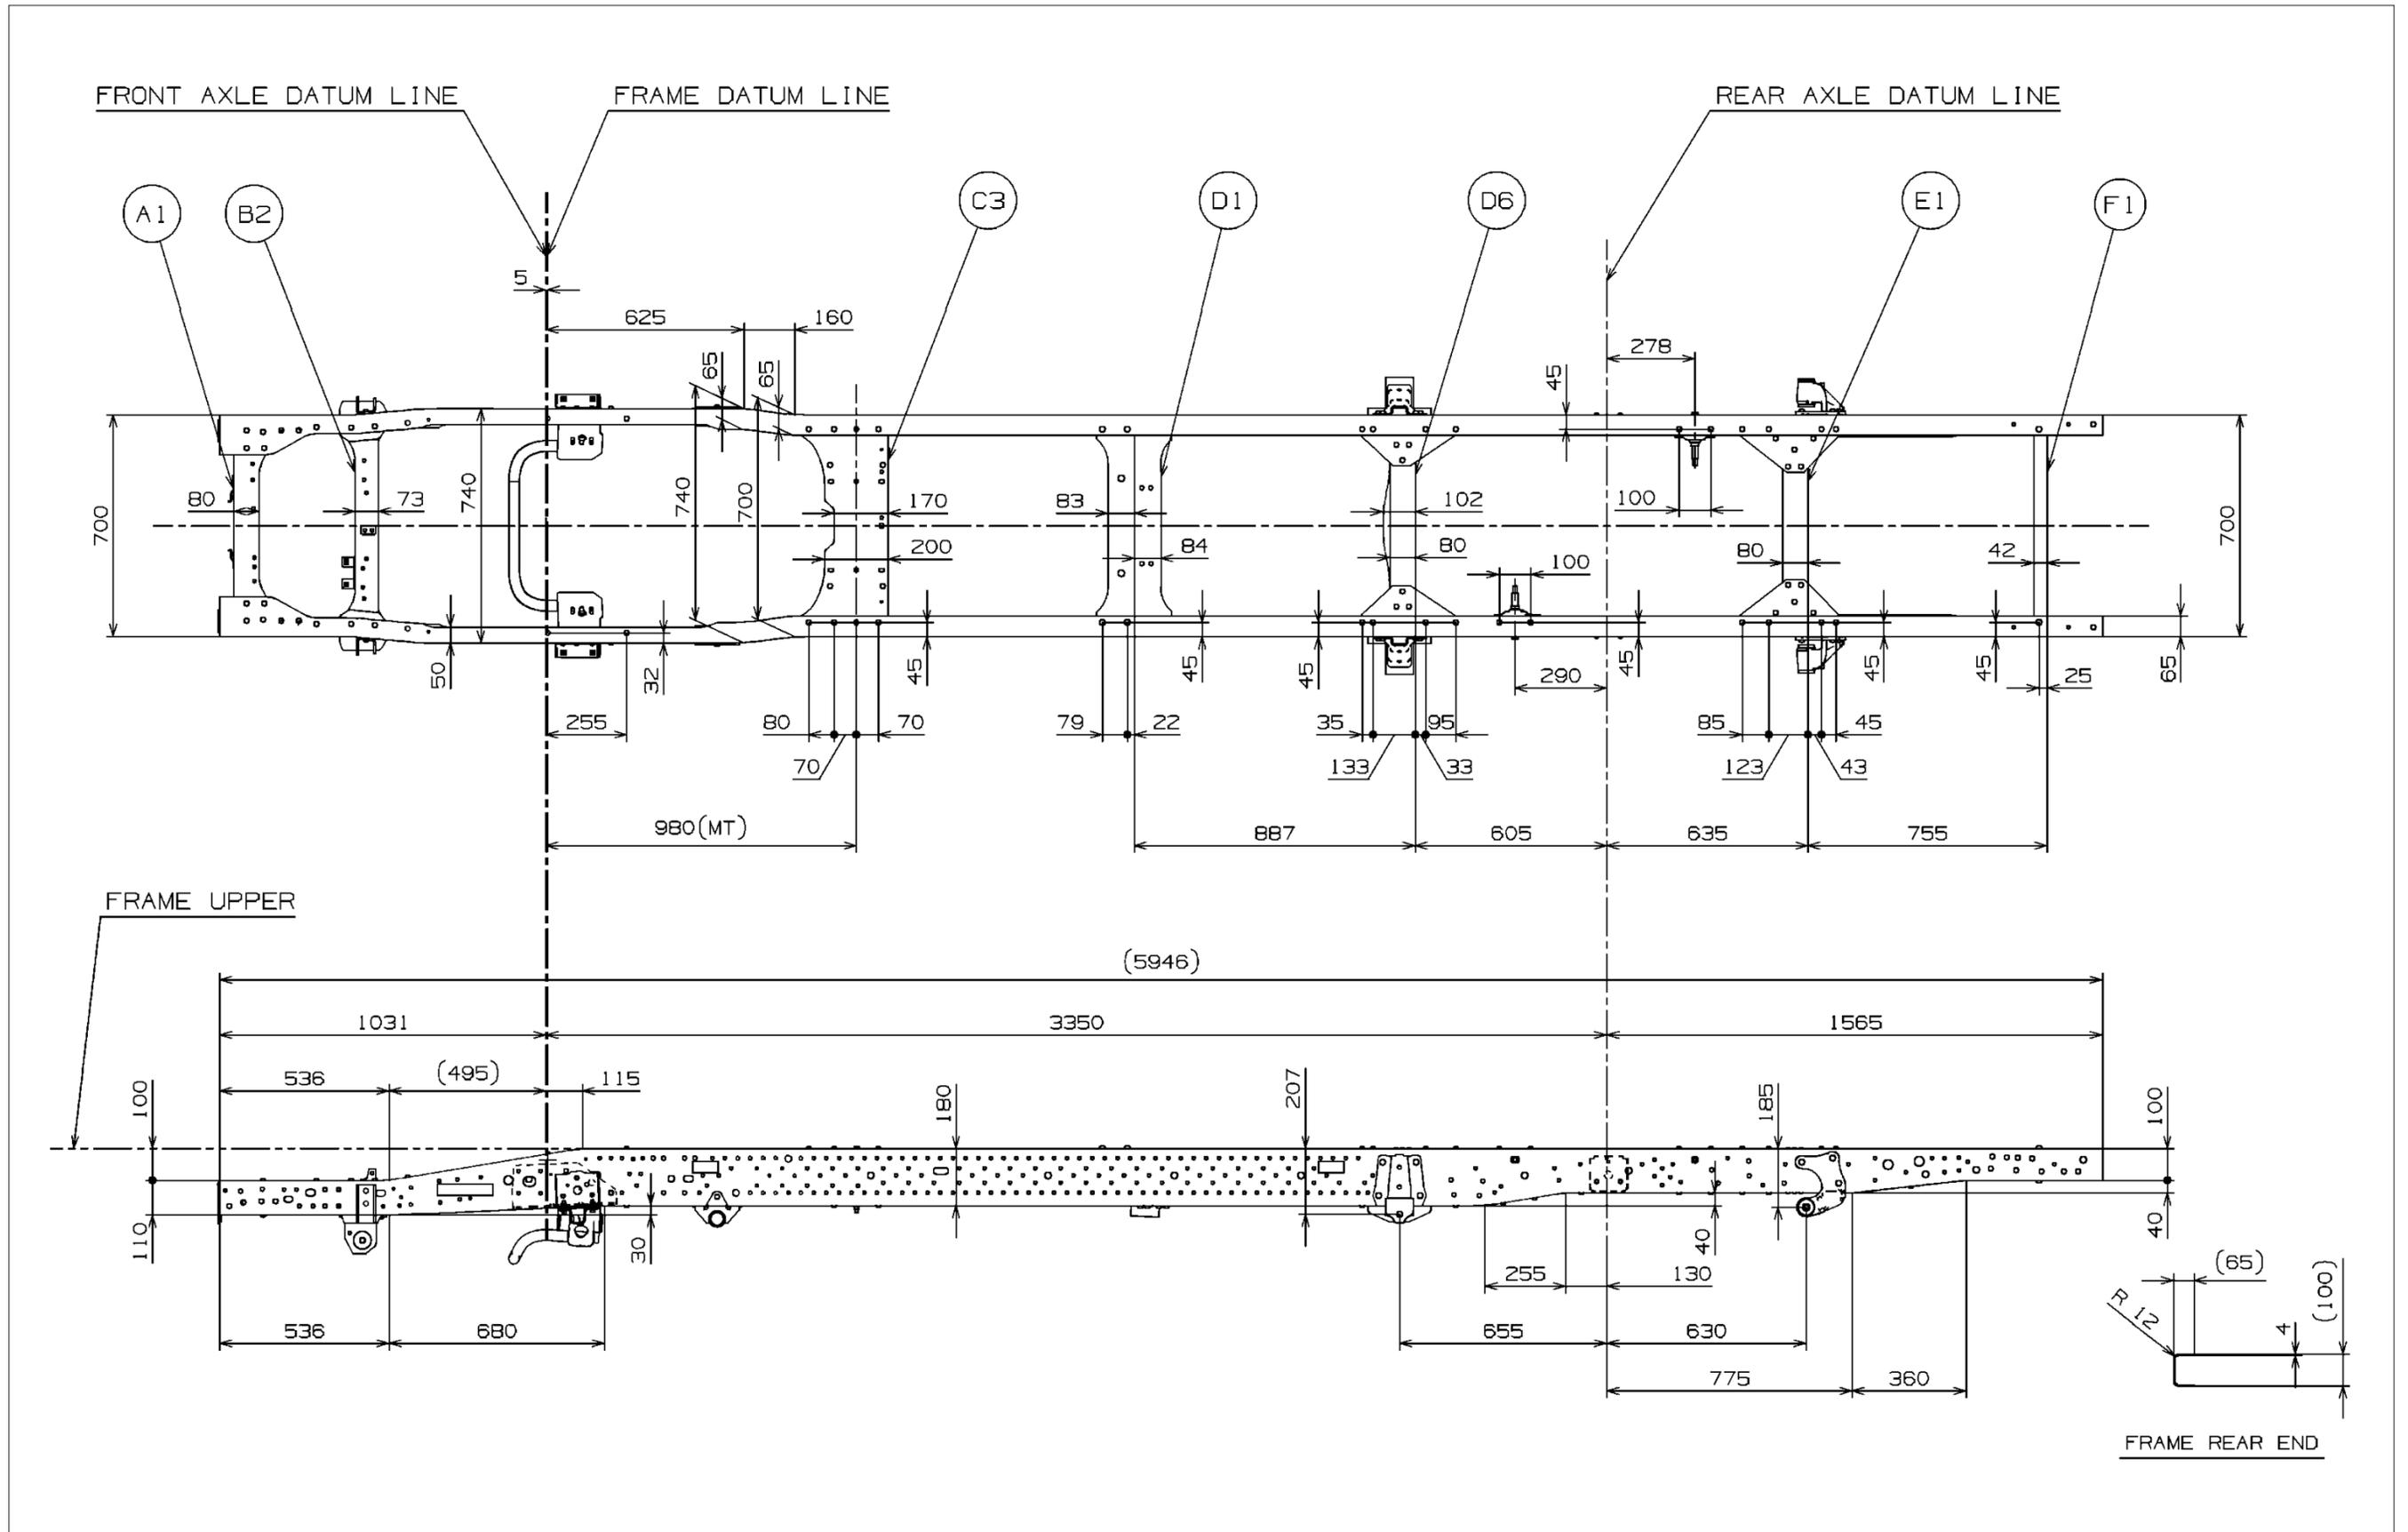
Chassis Frame Drawing NLR85L/U-HD5WYEN
